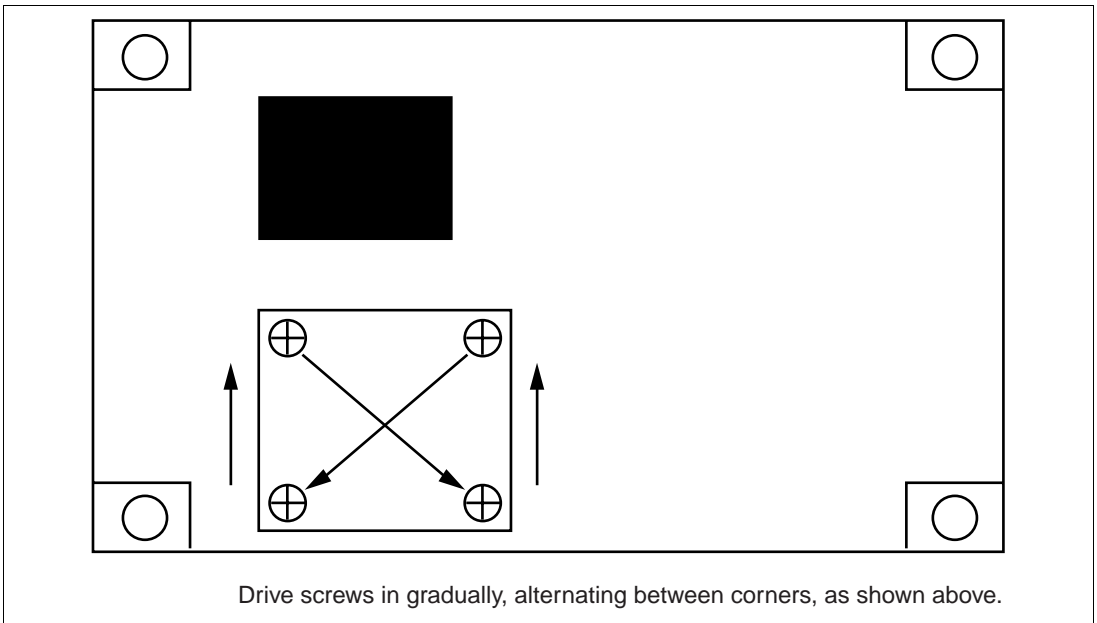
Order of Tightening the Screws (Top View of the HS7750REBH81H/HS7751REBH81H Board)
